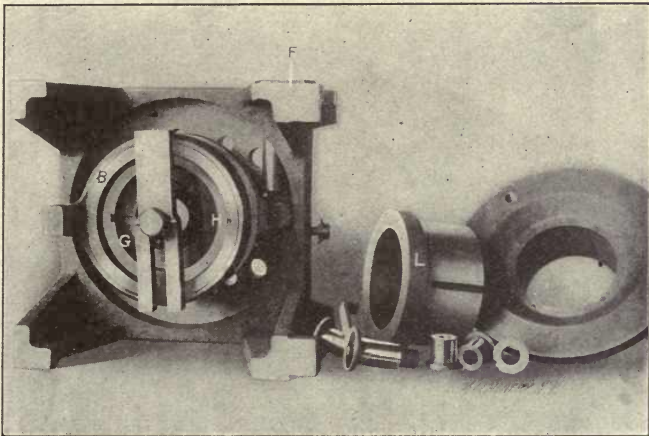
Drill Jig shown in Fig. 78 used for Drilling Friction Sleeve
